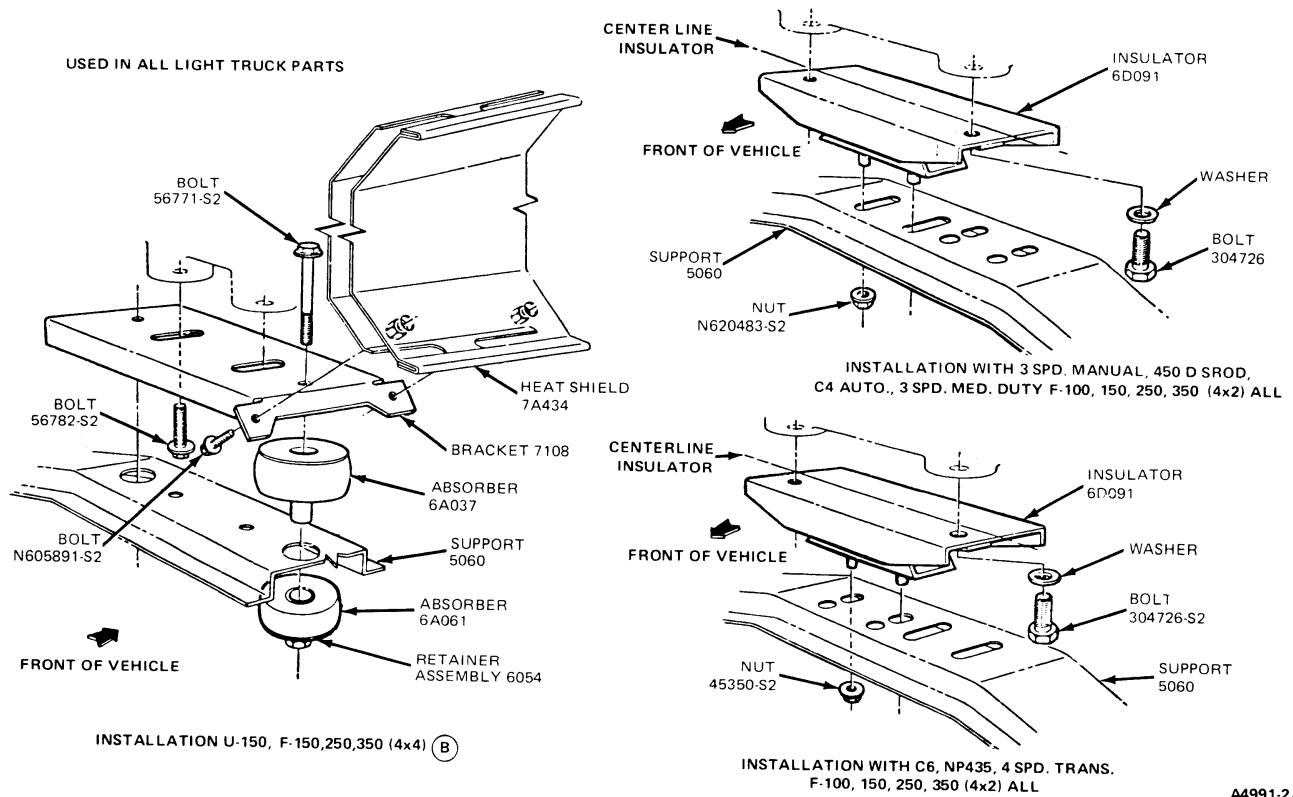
Engine Rear Support—F-100—F-350 (4x2) and Bronco
